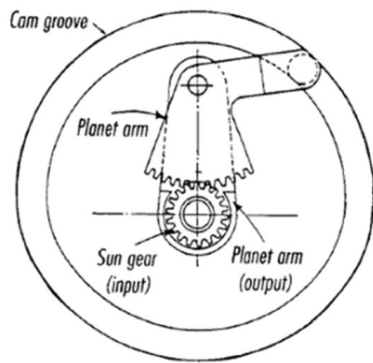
Planetary Gear-Cam mechanism with fixed cam [16].
